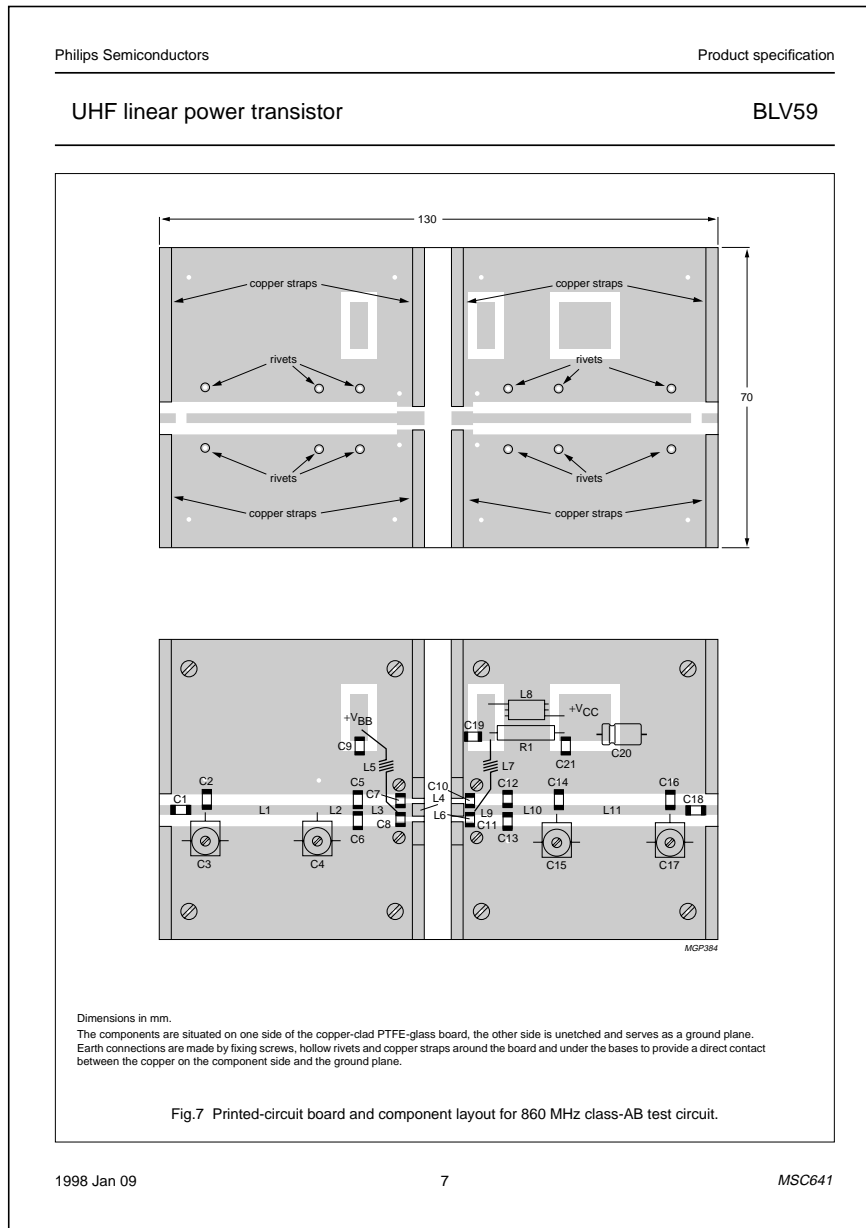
Board and component layout of the circuit shown in Fig.2-6.
